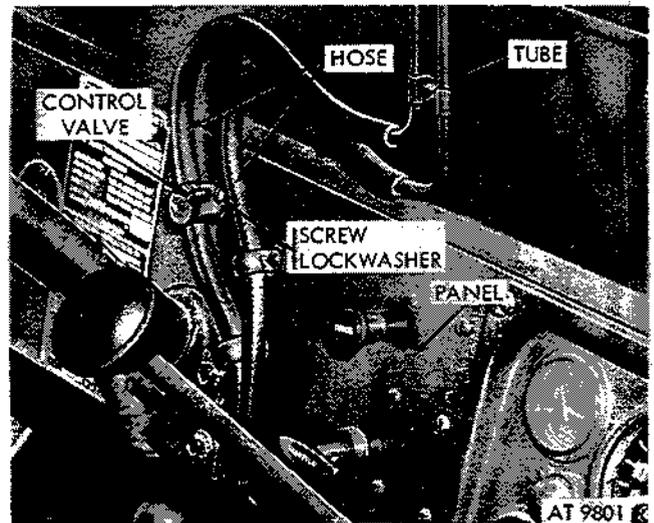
Remove windshield wiper control valve (M151, M151A1, M151A1C, and M718 vehicles).
